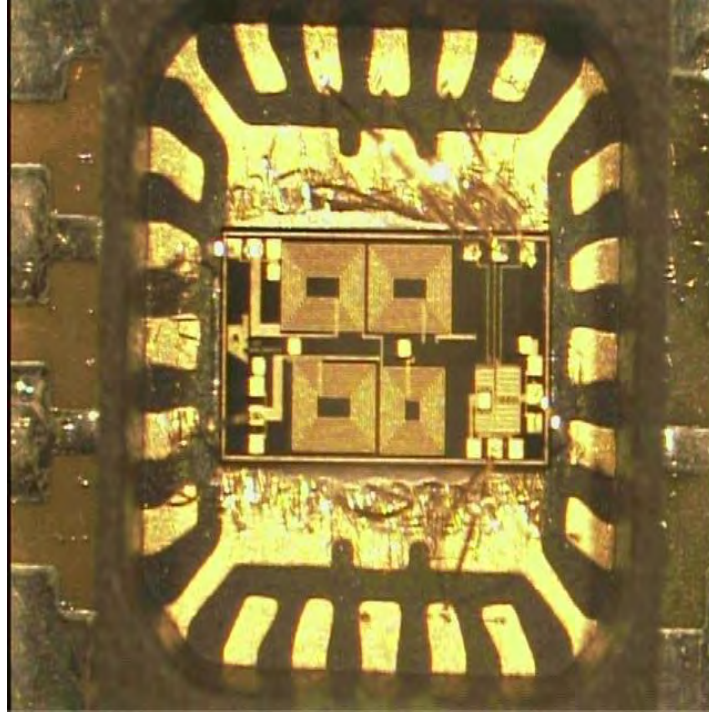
Photo of the ARL29M425S IC wirebonded in a 4x4 mm QFN package.
